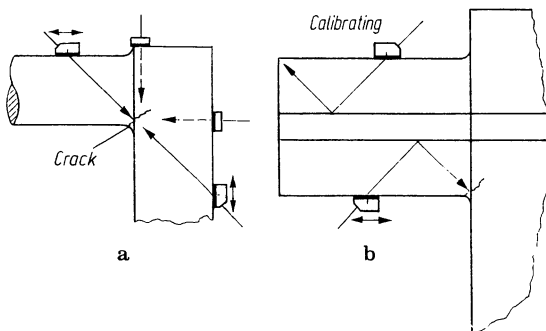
Testing for fatigue cracks on crankshafts and crankpins. a Without bore; b with bore
